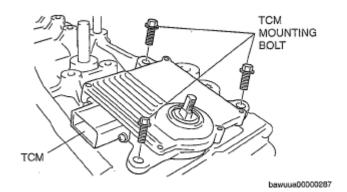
Identifying TCM Mounting Bolt Courtesy of MAZDA MOTORS CORP.
